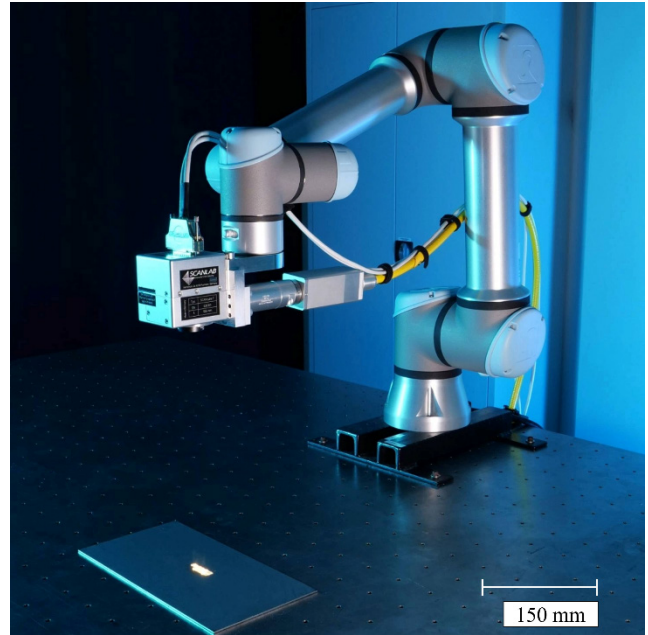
Universal Robots UR5e with Scanlab ScanCube 7 during laser marking of AISI 304 (EN 1.4301) stainless steel
